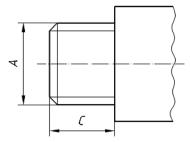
Threaded inlets of taps with visible body for mounting on vertical surfaces
